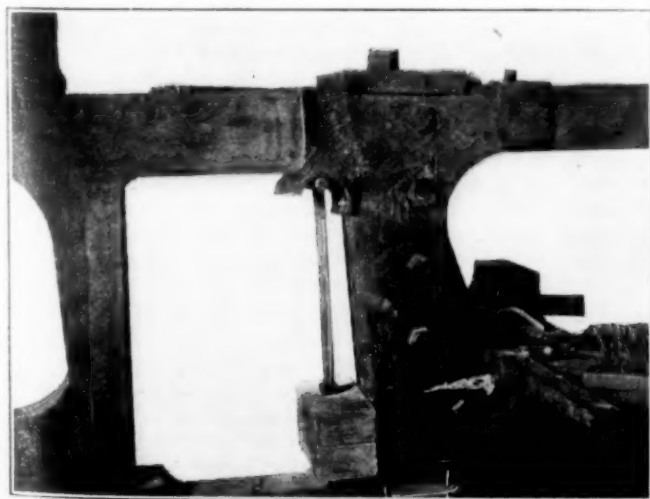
ENGINE FRAME IN COURSE OF REPAIR BY WELDING
